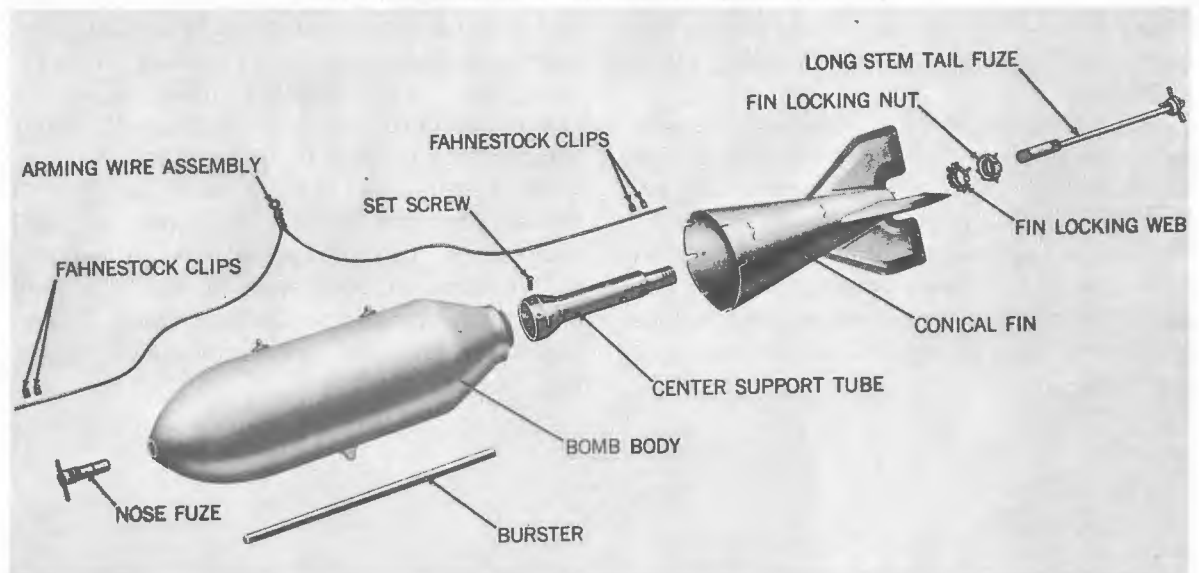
Incendiary Bomb AN-M76 with Fin Assembly M128A1, Exploded View.
